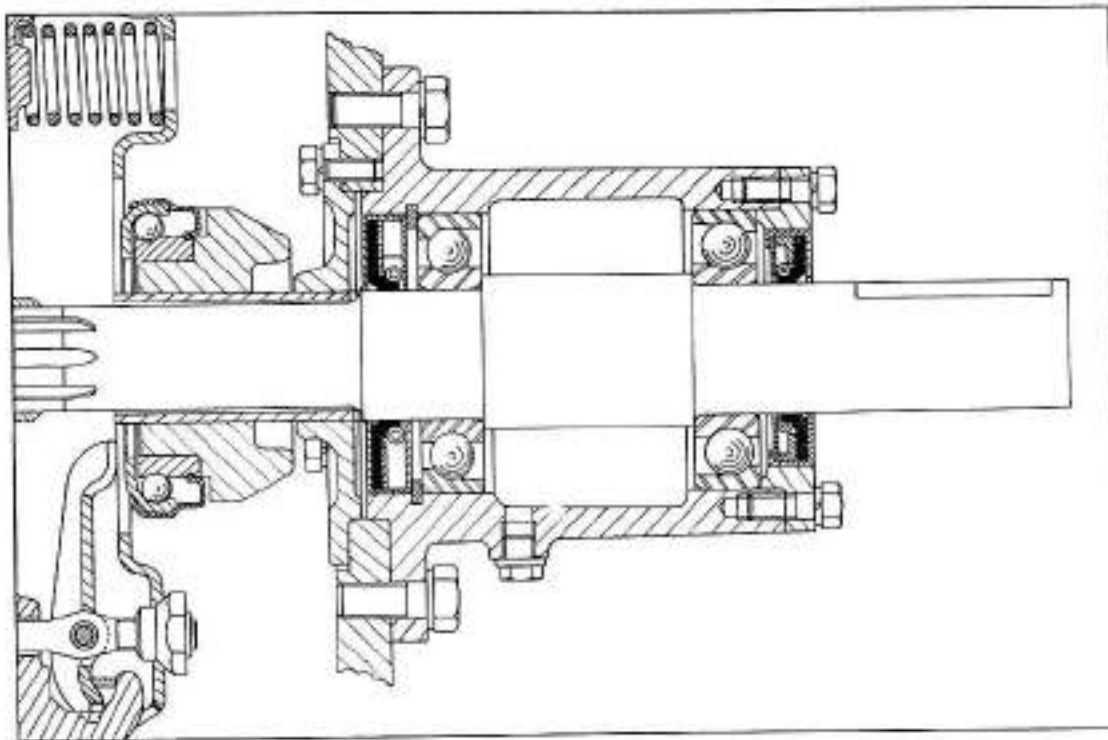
SECTION OF SD2 12 OUTPUT BEARING
